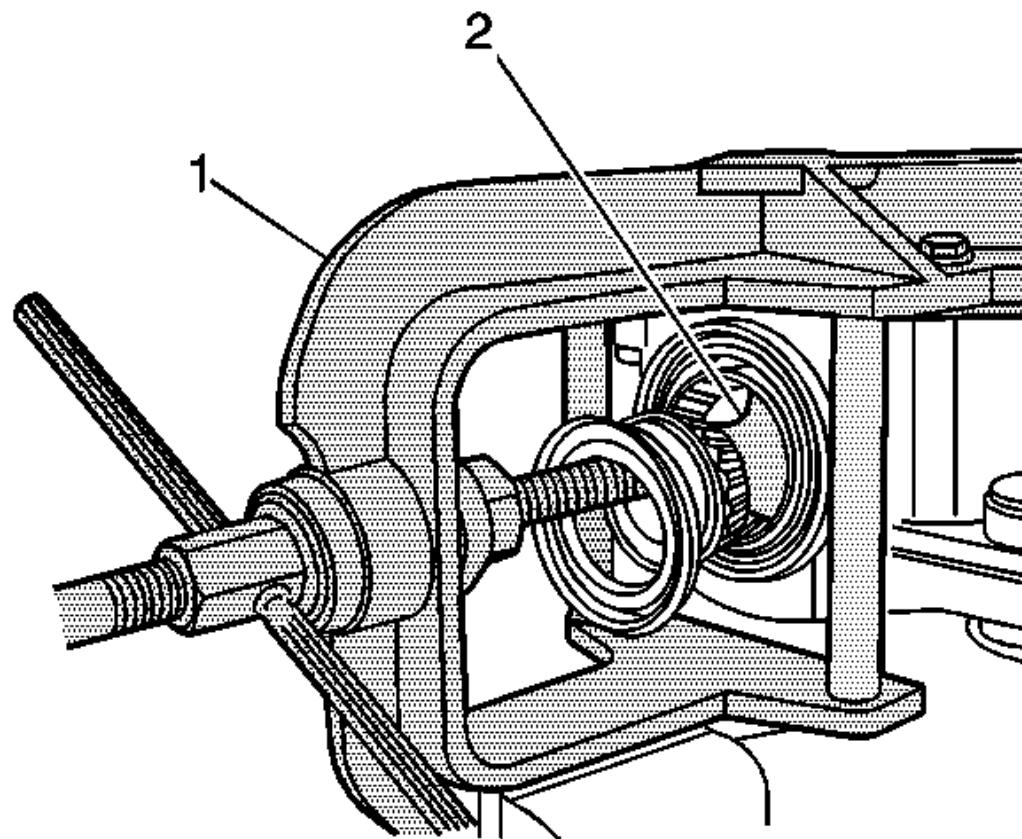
Pinion Oil Seal & Bearing Using Forcing Screw J 36598 To J 36598-5
